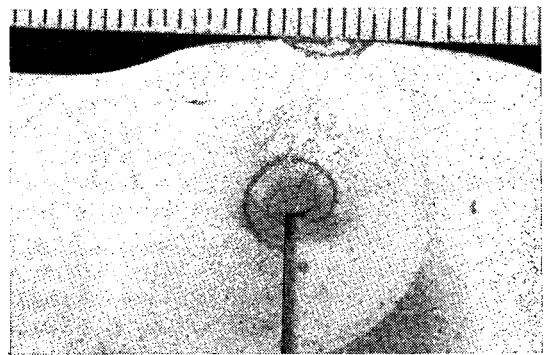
Fracture Surface with Beach Marks of T-10 Specimen.
